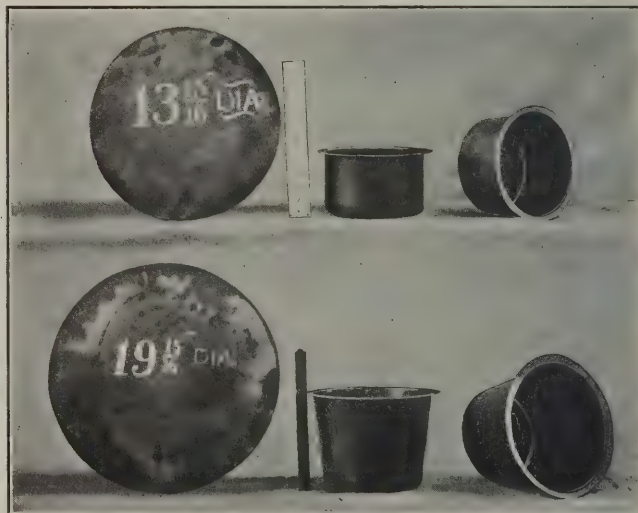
Blanks and Shells produced from Flat Blank in one Operation on Bliss Double-draw Press
